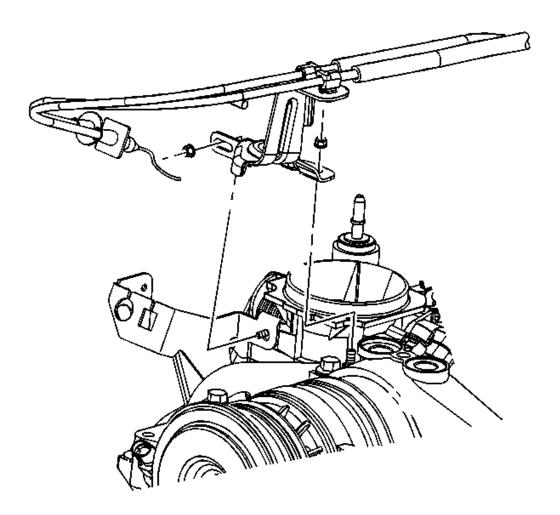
View Of Accelerator Control Cable Bracket Courtesy of GENERAL MOTORS CORP.
